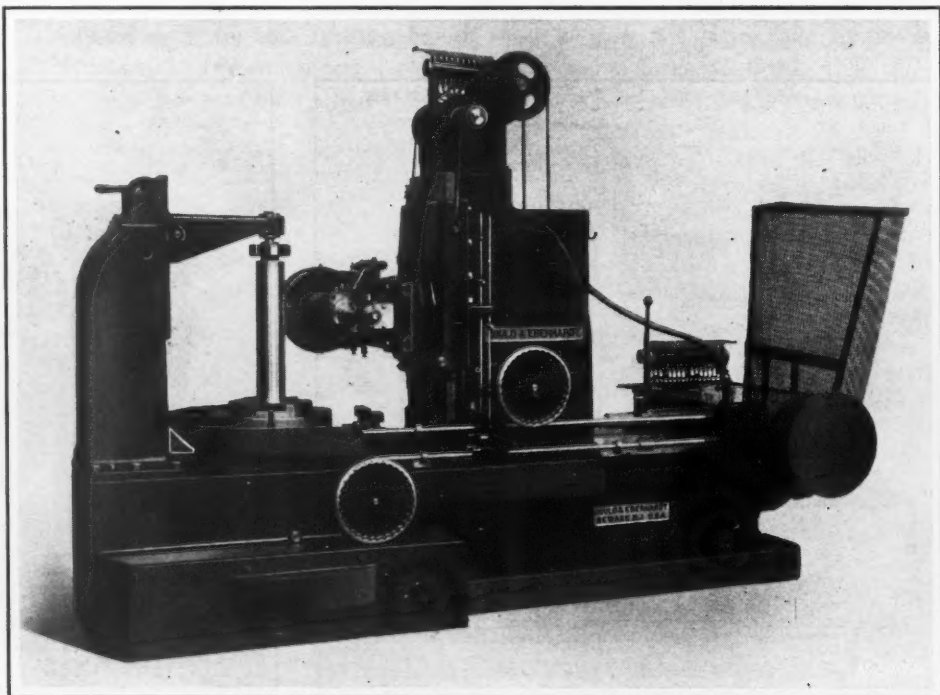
Gould & Eberhardt Automatic Gear-hobbing Machine
